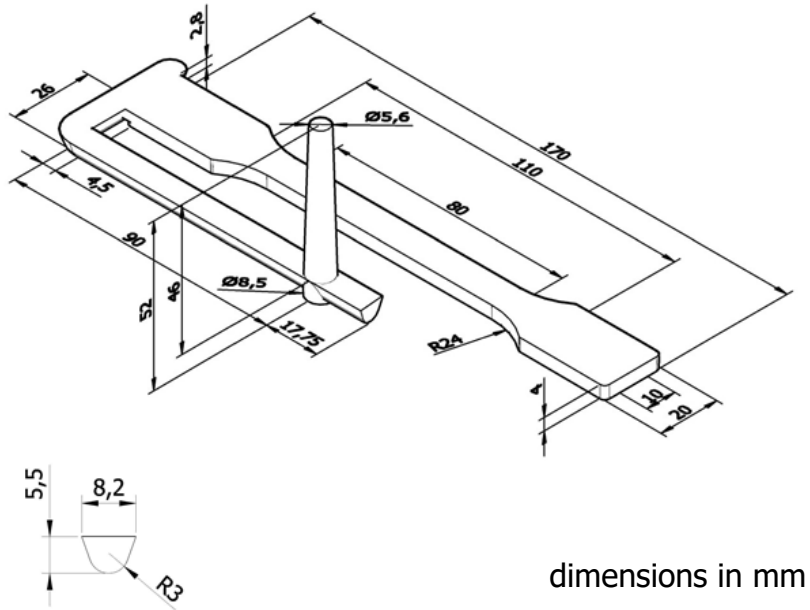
Drawing of the cavity of the multi-purpose (or tensile) specimen with one cavity sealed.
